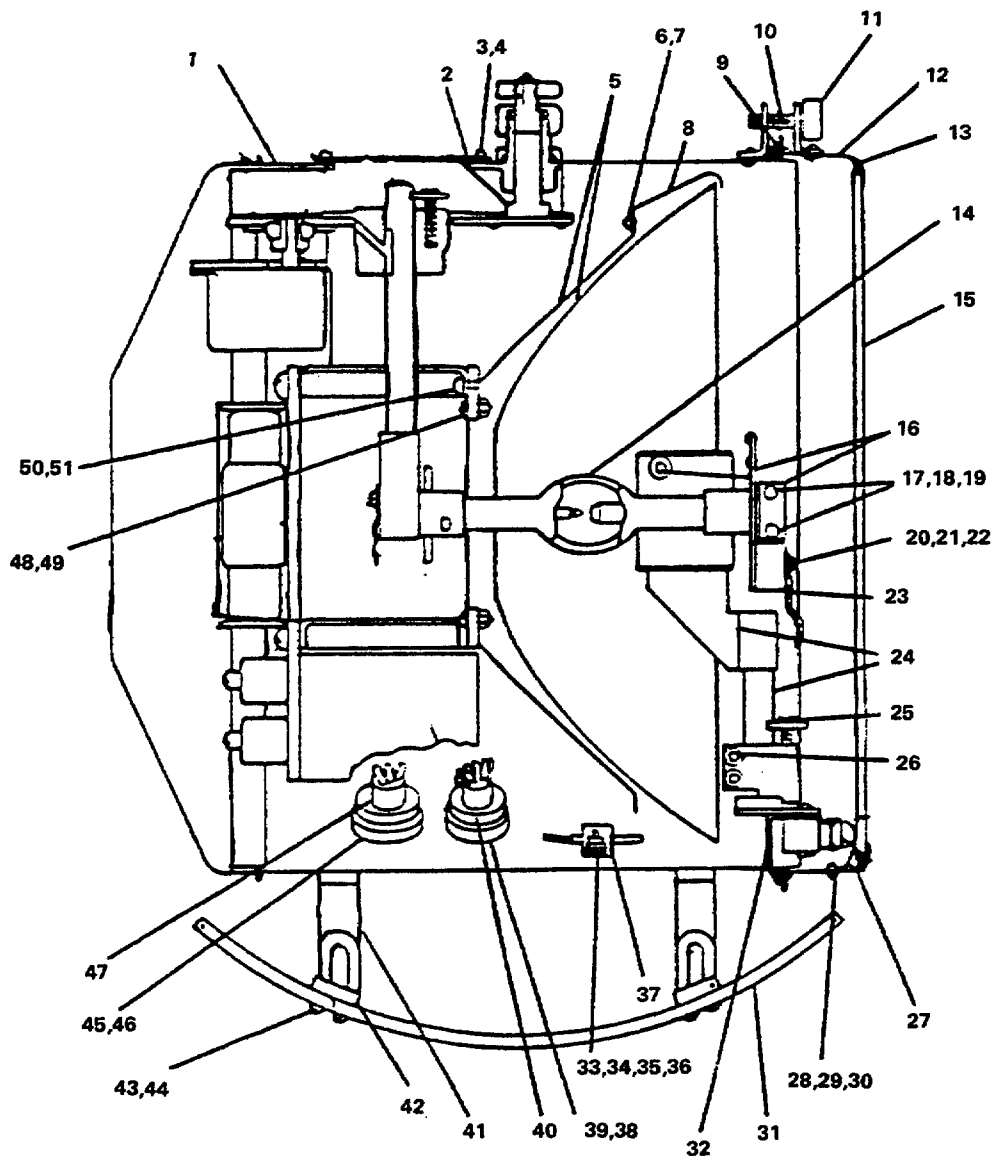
Replace/Repair Drum Assembly (Sheet 1 of 4).
